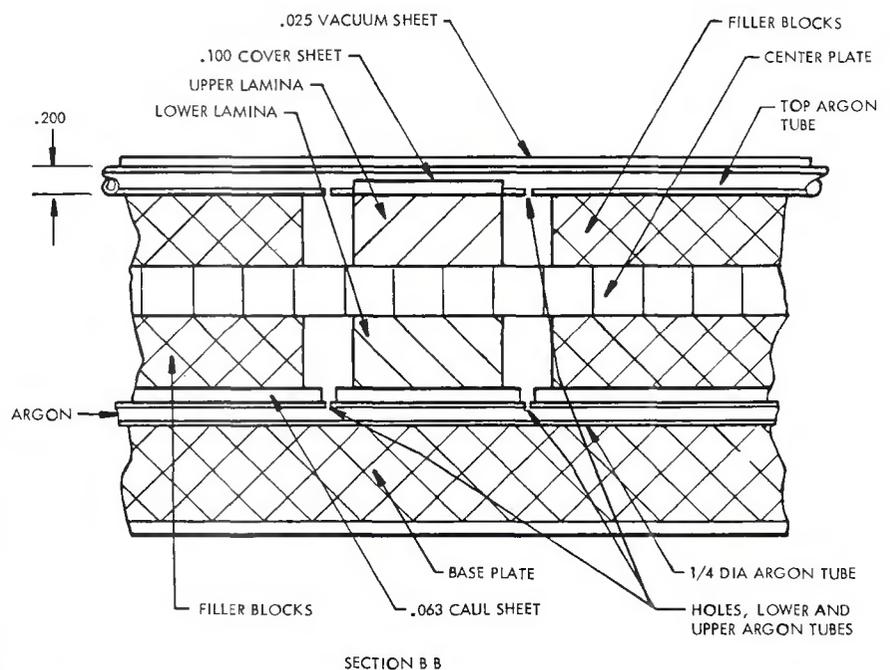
Retort purging system (Section B-B of Fig. 8)
